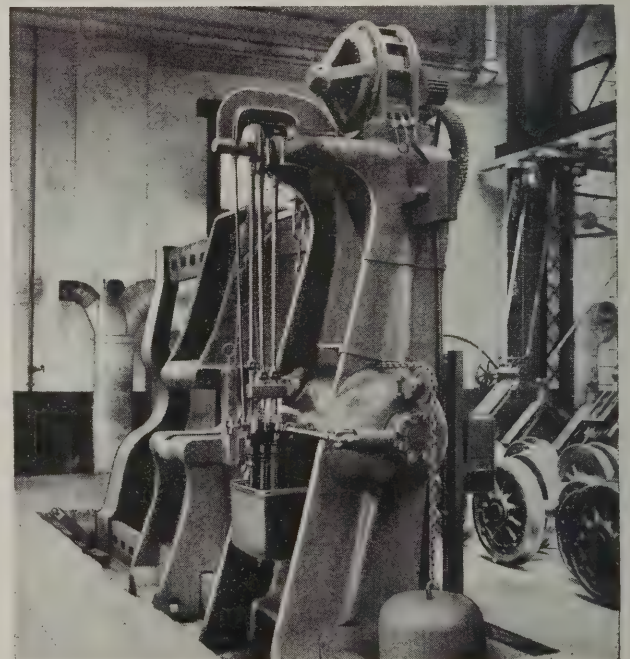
A 600-Ton Wheel Press Driven By a 25 Hp. Alternating Current Motor
